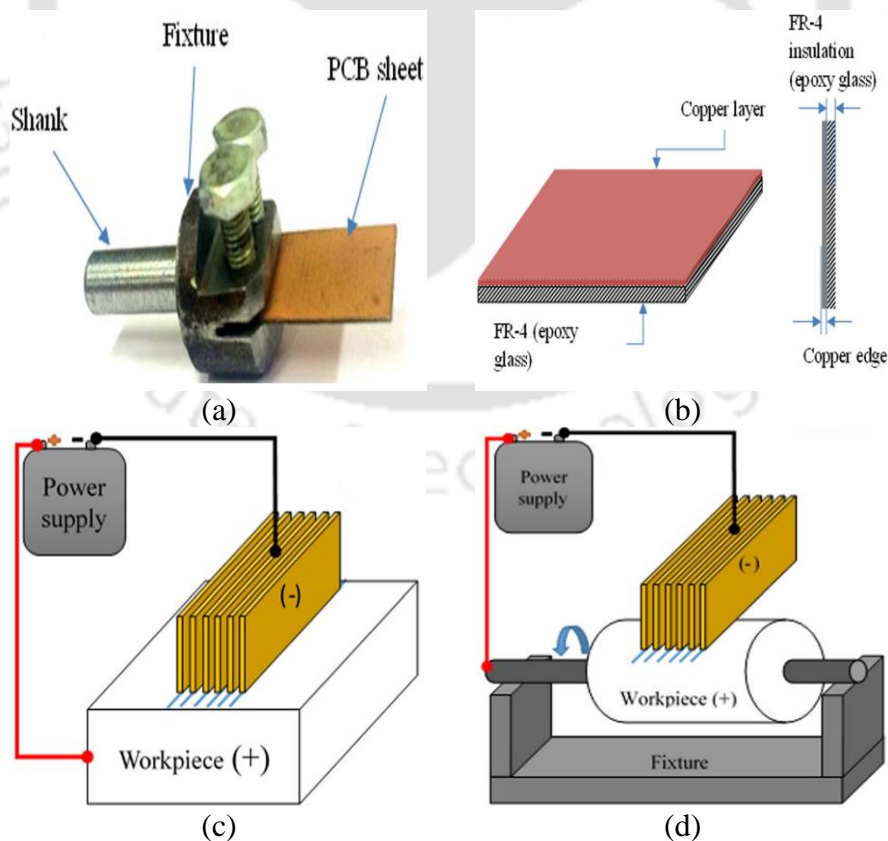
(a) PCB tool with fixture and (b) PCB sheet and its cross-section; Micro-channel on (c) flat and (d) curve surfaces [21]
